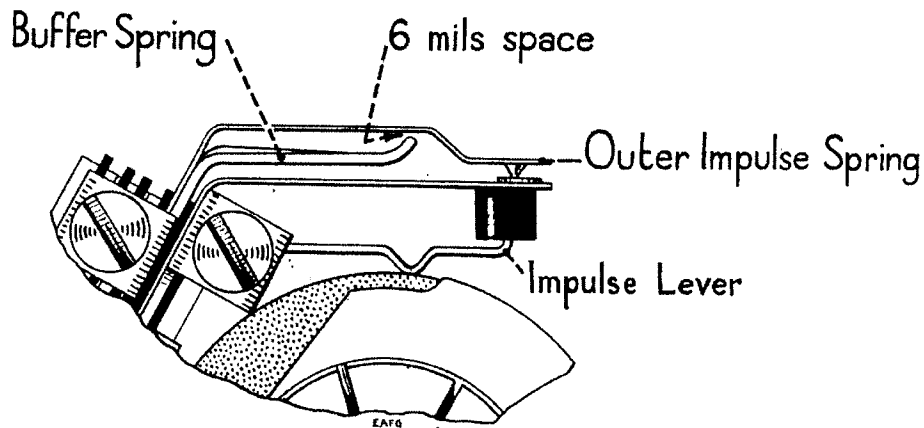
ADJUSTMENT OF BUFFER SPRING (SHOWING 6-MIL CLEARANCE BETWEEN THE BUFFER AND THE OUTER IMPULSE SPRING)
